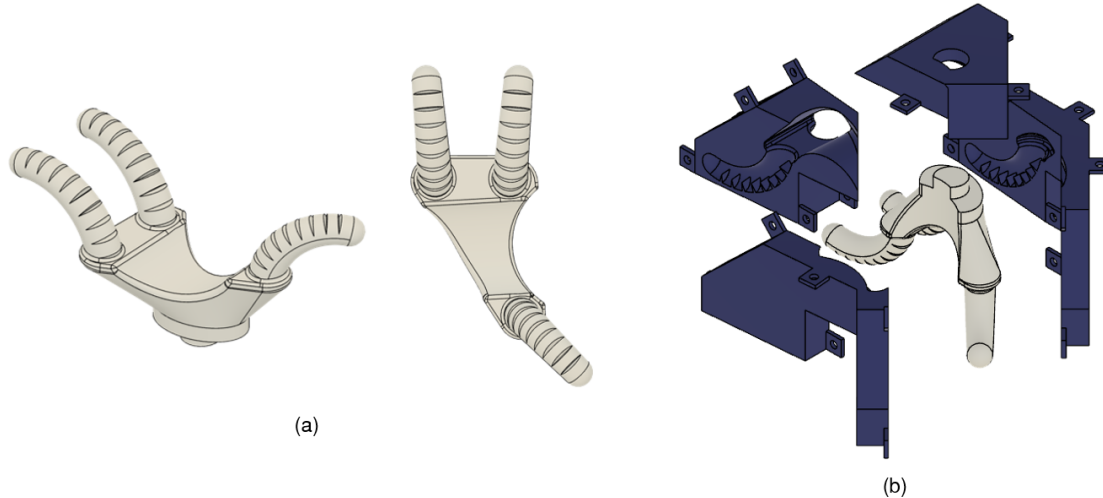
(a) CAD images of the foam hand prototype. (b) CAD model of the multi-part mold used to fabricate the foam hand.
